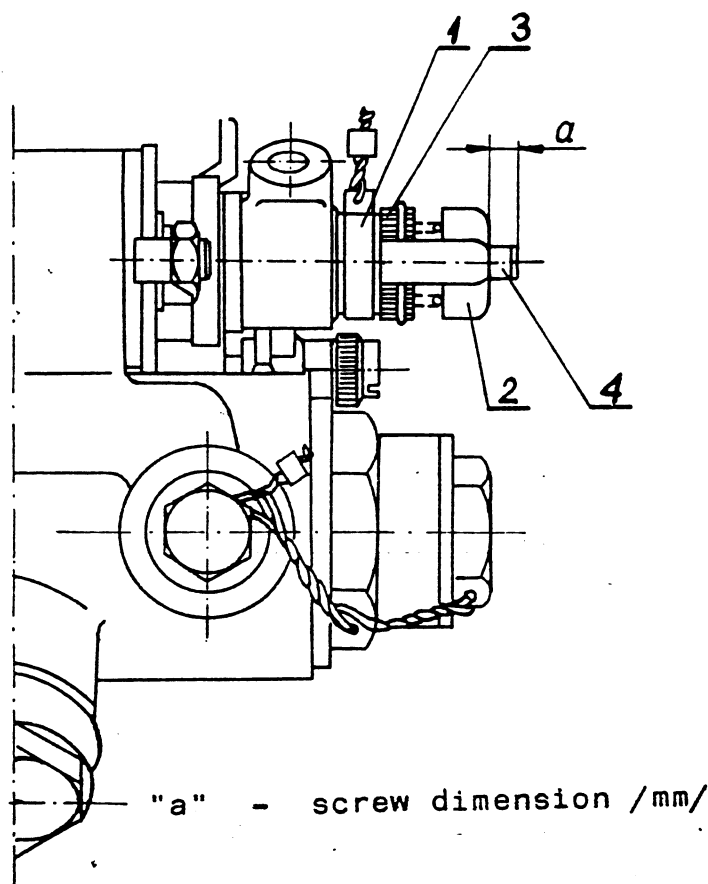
OOWT-3 Accessory Control Screw Layout
